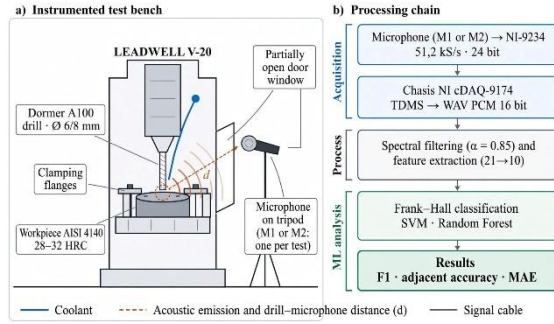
General structure of the study. (a) Instrumented test bench: AISI 4140 workpiece clamped with fixtures on the table, Dormer A100 drill ($\phi 6/8$ mm), machining zone with coolant, and relative position (d) of the microphone, mounted on a tripod resting on the floor in front of the partially open door window; each trial used a single microphone, M1 (TXL 235, dynamic; trials E1–E2) or M2 (PG81 SHURE, condenser; trials E3–E7). (b) Processing and analysis chain: NI cDAQ-9174 + NI-9234 acquisition, spectral filtering, feature extraction, ordinal labeling, and Frank–Hall classification.
